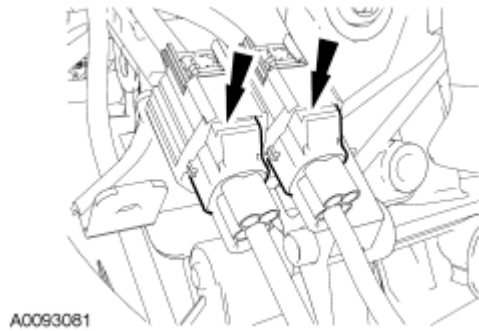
Locating Electrical Connectors And Wiring Retainers
